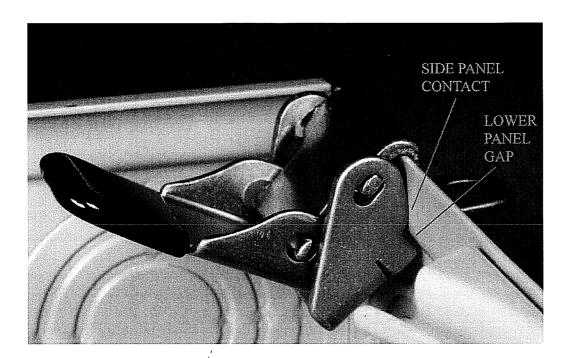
A and 2B of Exhibit A show the ProLock Product 1 without a lever. 11. The ProLock Product 1 has a lever. In actual operation, it is not possible for the clamping member to touch the second flange of the mounting bracket because the lever is in between the clamping member and second flange. The photo below of the ProLock Product 1 shows that the lever 4 prevents the clamping member from touching the second flange 3. ProLock Product 2 works in a similar fashion:
